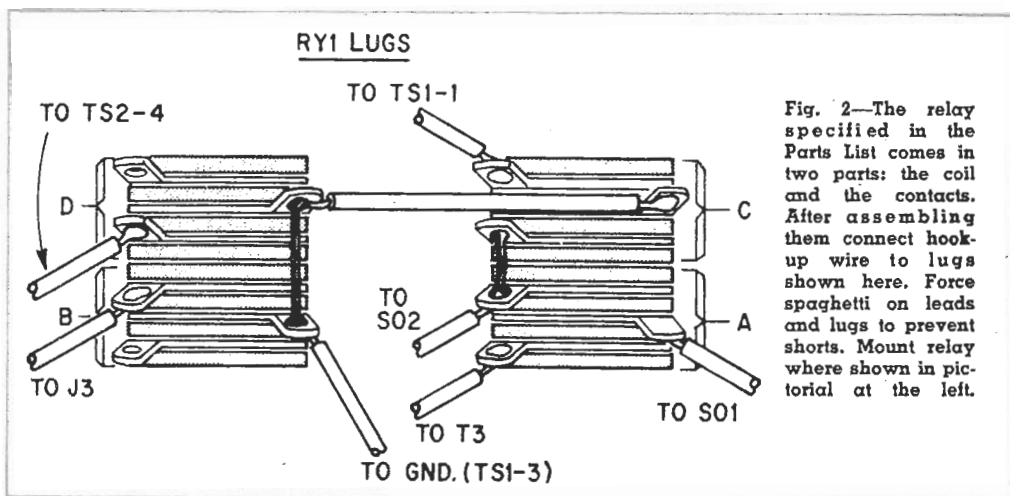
The relay specified in the Parts List comes in two parts: the coil and the contacts. After assembling them connect hook-up wire to lugs shown here. Force spaghetti on leads and lugs to prevent shorts. Mount relay where shown in pictorial at the left.
